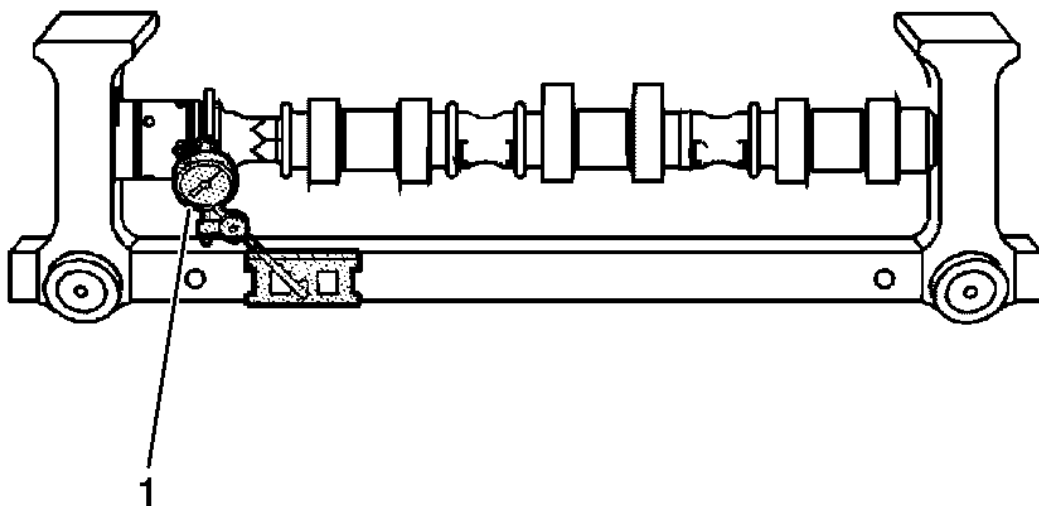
Identifying Camshaft Measurement Procedure Using Dial Indicator
